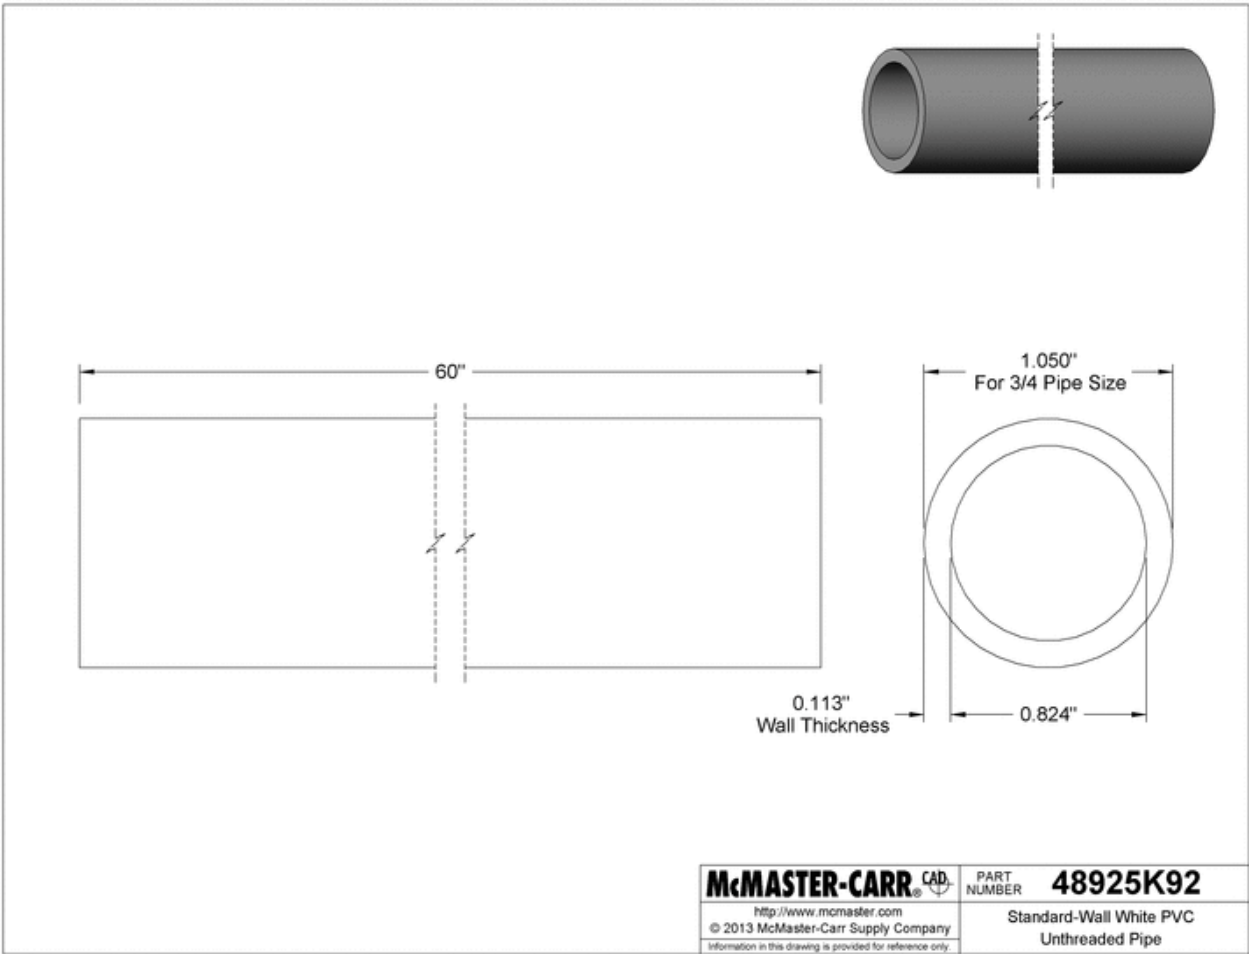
3/4 Inch PVC Pipe Engineering Drawing [28]
